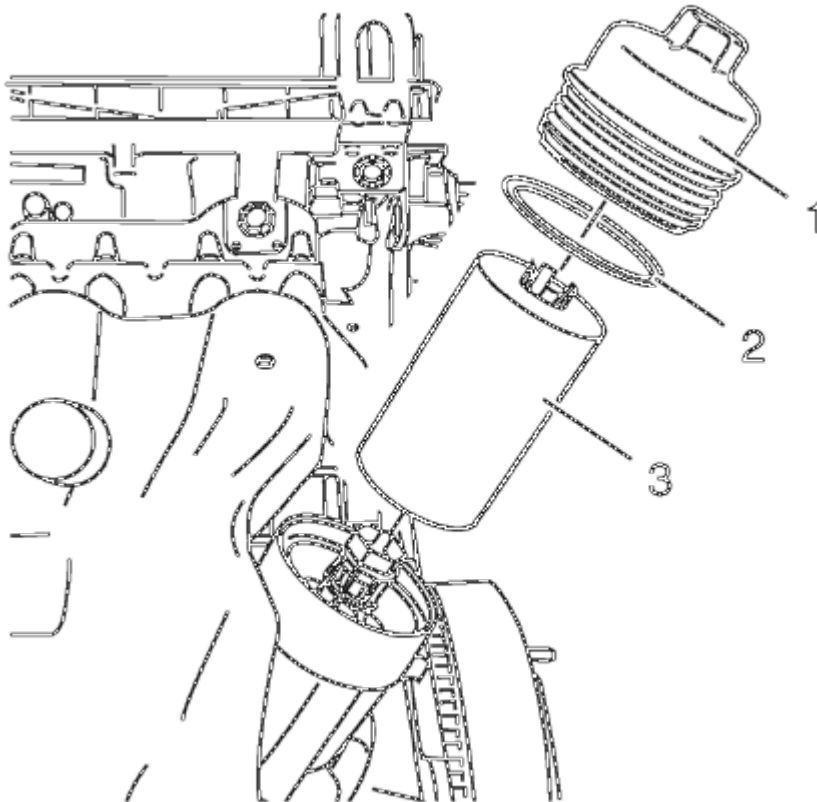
Oil Filter Cap, Oil Filter Seal And Oil Filter Insert
